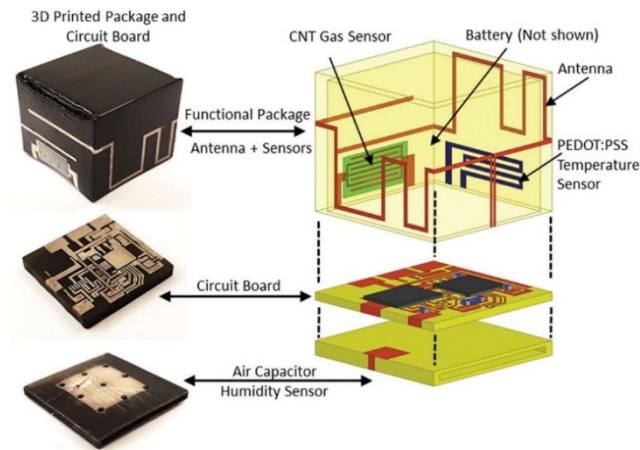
An example of a 3D-printed, wireless sensor device [34].
